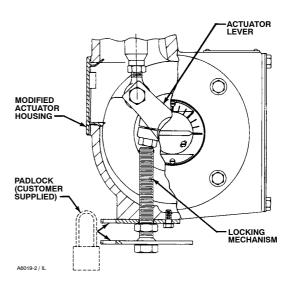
Actuator Locking Mechanism for Sizes 40, 60, and 70
